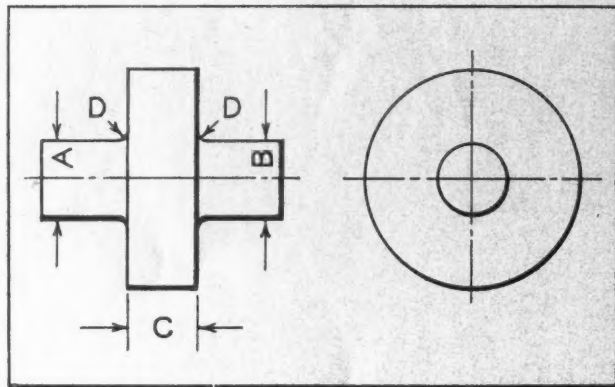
Diameters (A) and (B), width (C), and fillets (D) of this small, double-ended rivet must be maintained within specified tolerances in order to obtain satisfactory assembled chains
